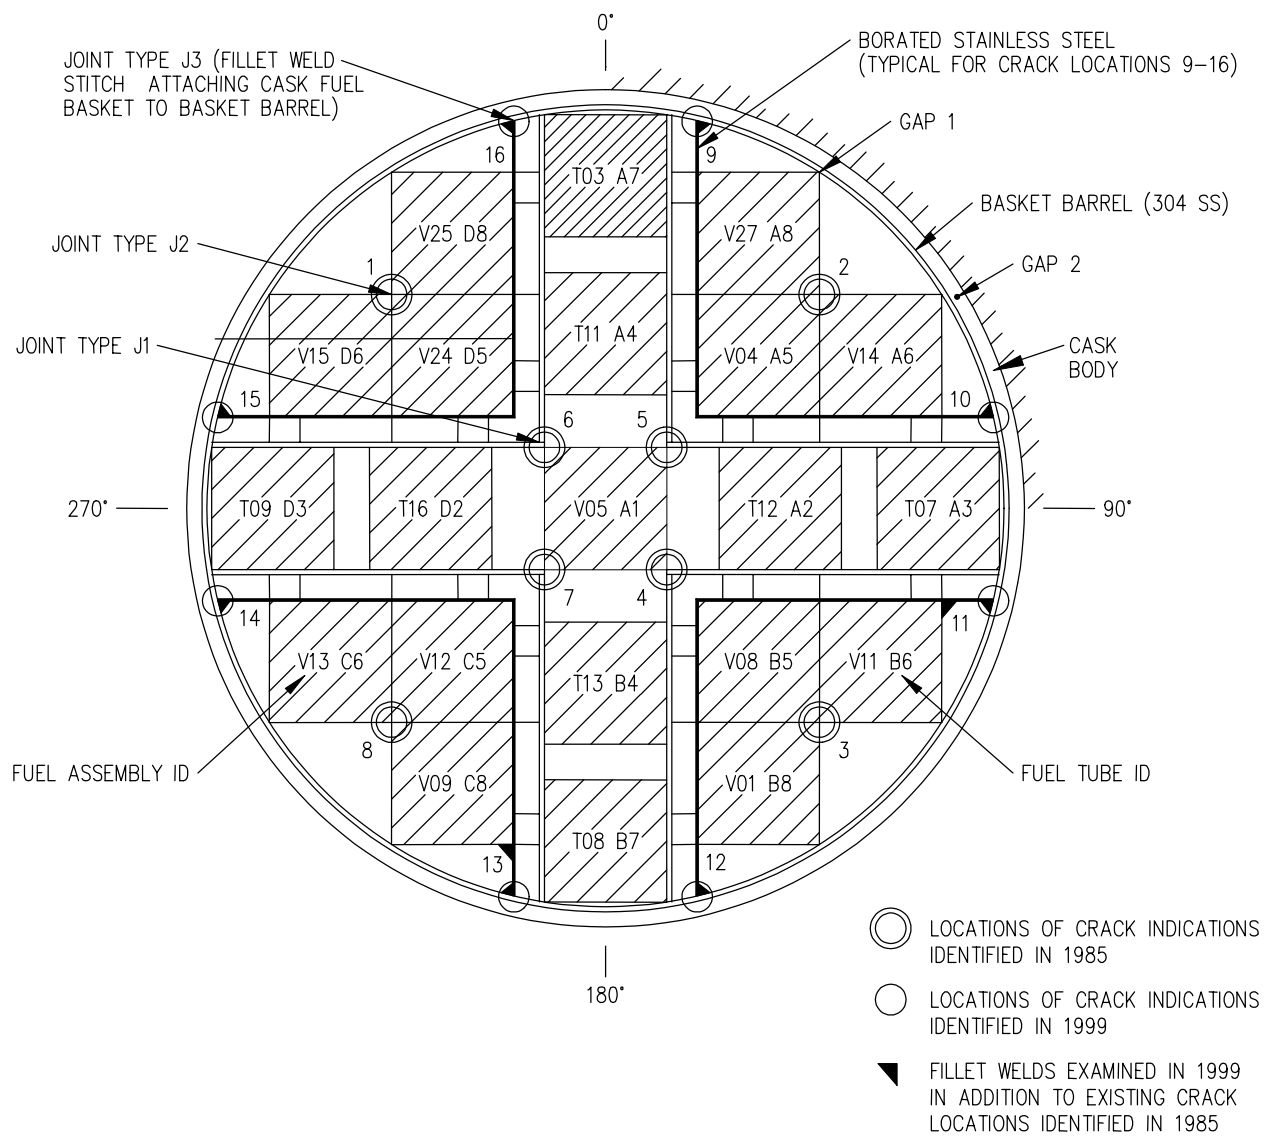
CASTOR-V/21 basket crack indication locations and fuel tube arrangement.
